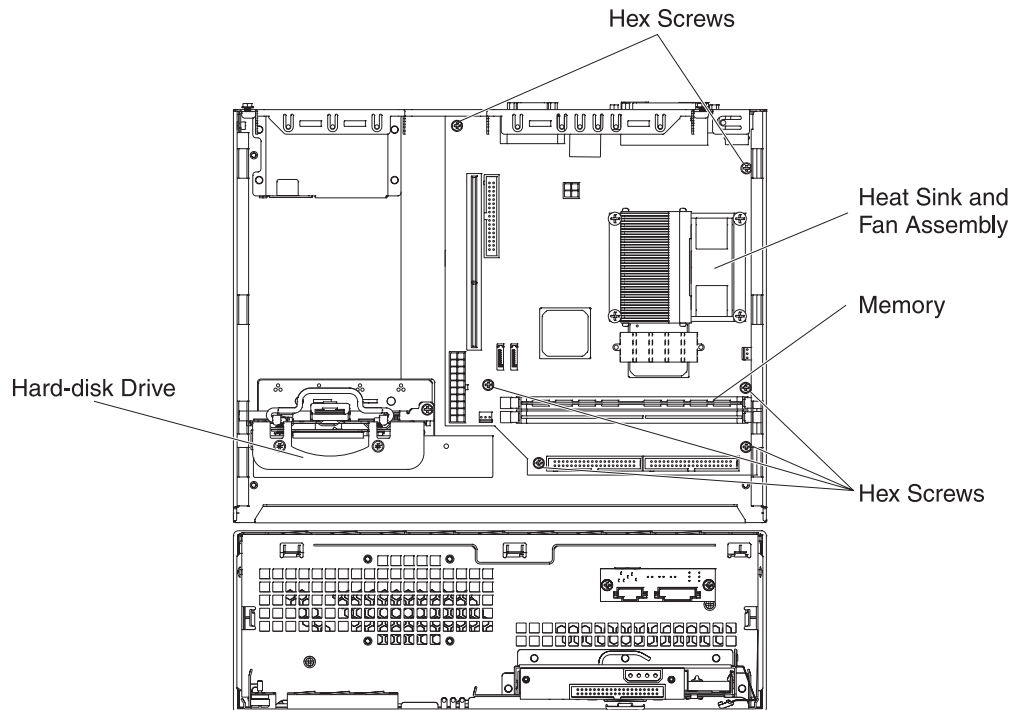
Removing the planar. (View after the riser card assembly has been removed)
